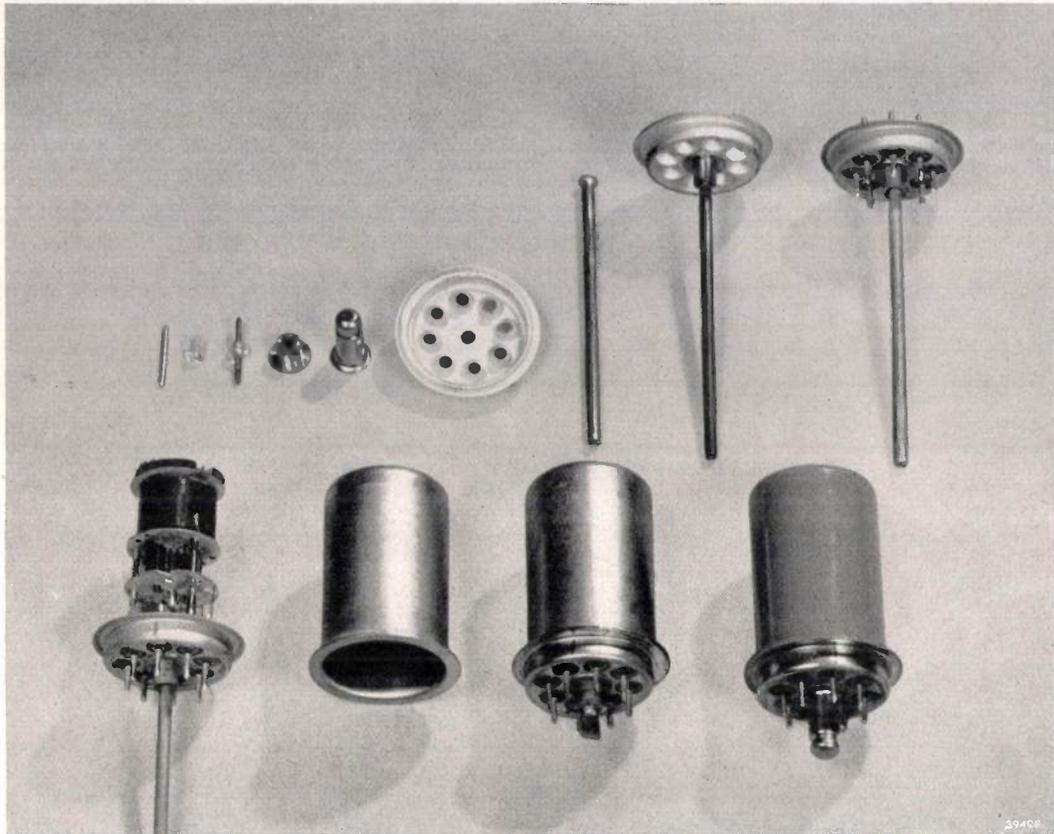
The parts of the metal key valve in different stages of manufacture. Upper row, left to right: one of the 8 fused-in leads; glass tube to make bead; bead fused on pin; "cap" upon which the spigot is later welded; spigot; metal base plate with holes; metal exhaust tube; combination of base plate, exhaust tube and cap complete the base plate with fused-in pins. Lower row: electrode system assembled and mounted on the pins; metal envelope; valve after being exhausted and finally the completed valve.
